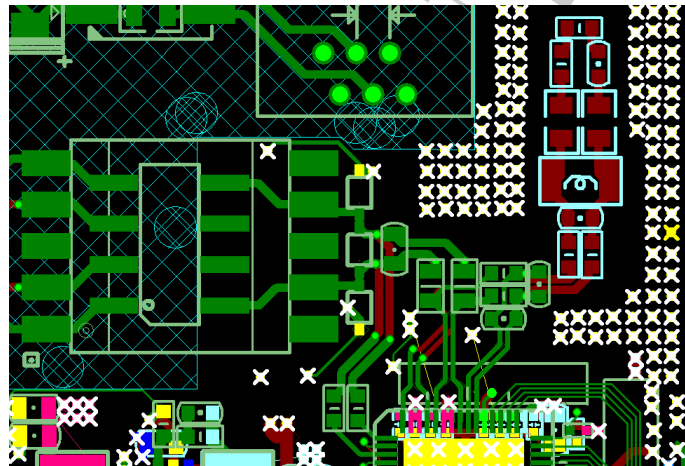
Line Driver Top and Bottom Layer Layout.
